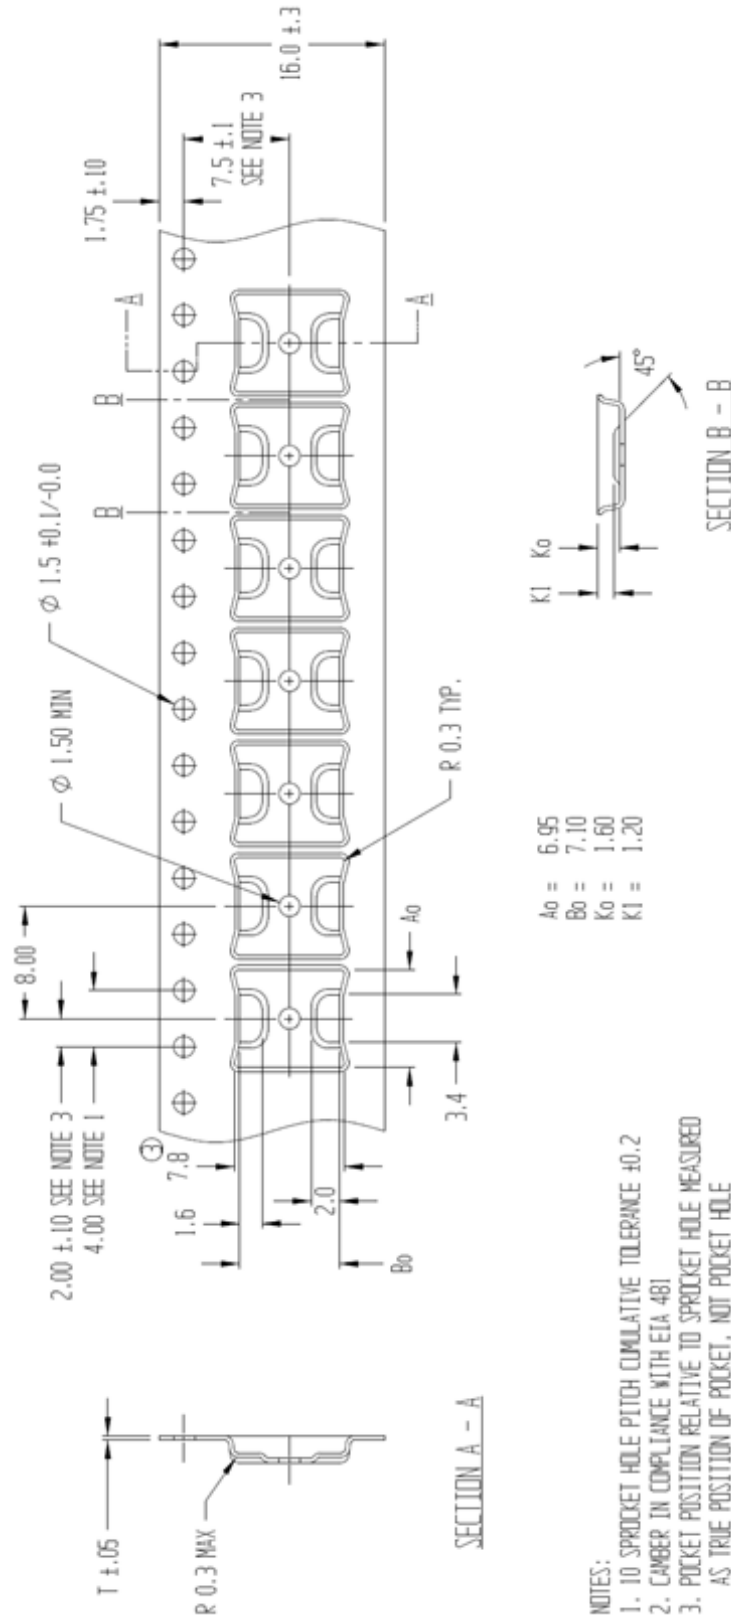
TSSOP-20 tape (dimensions in mm) outline
